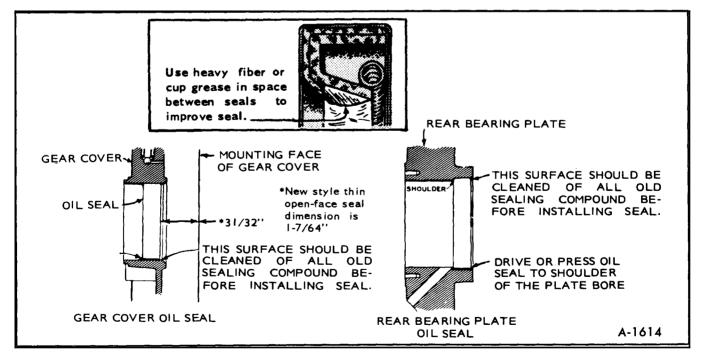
Gear Cover and Rear Bearing Plate Oil Seals
